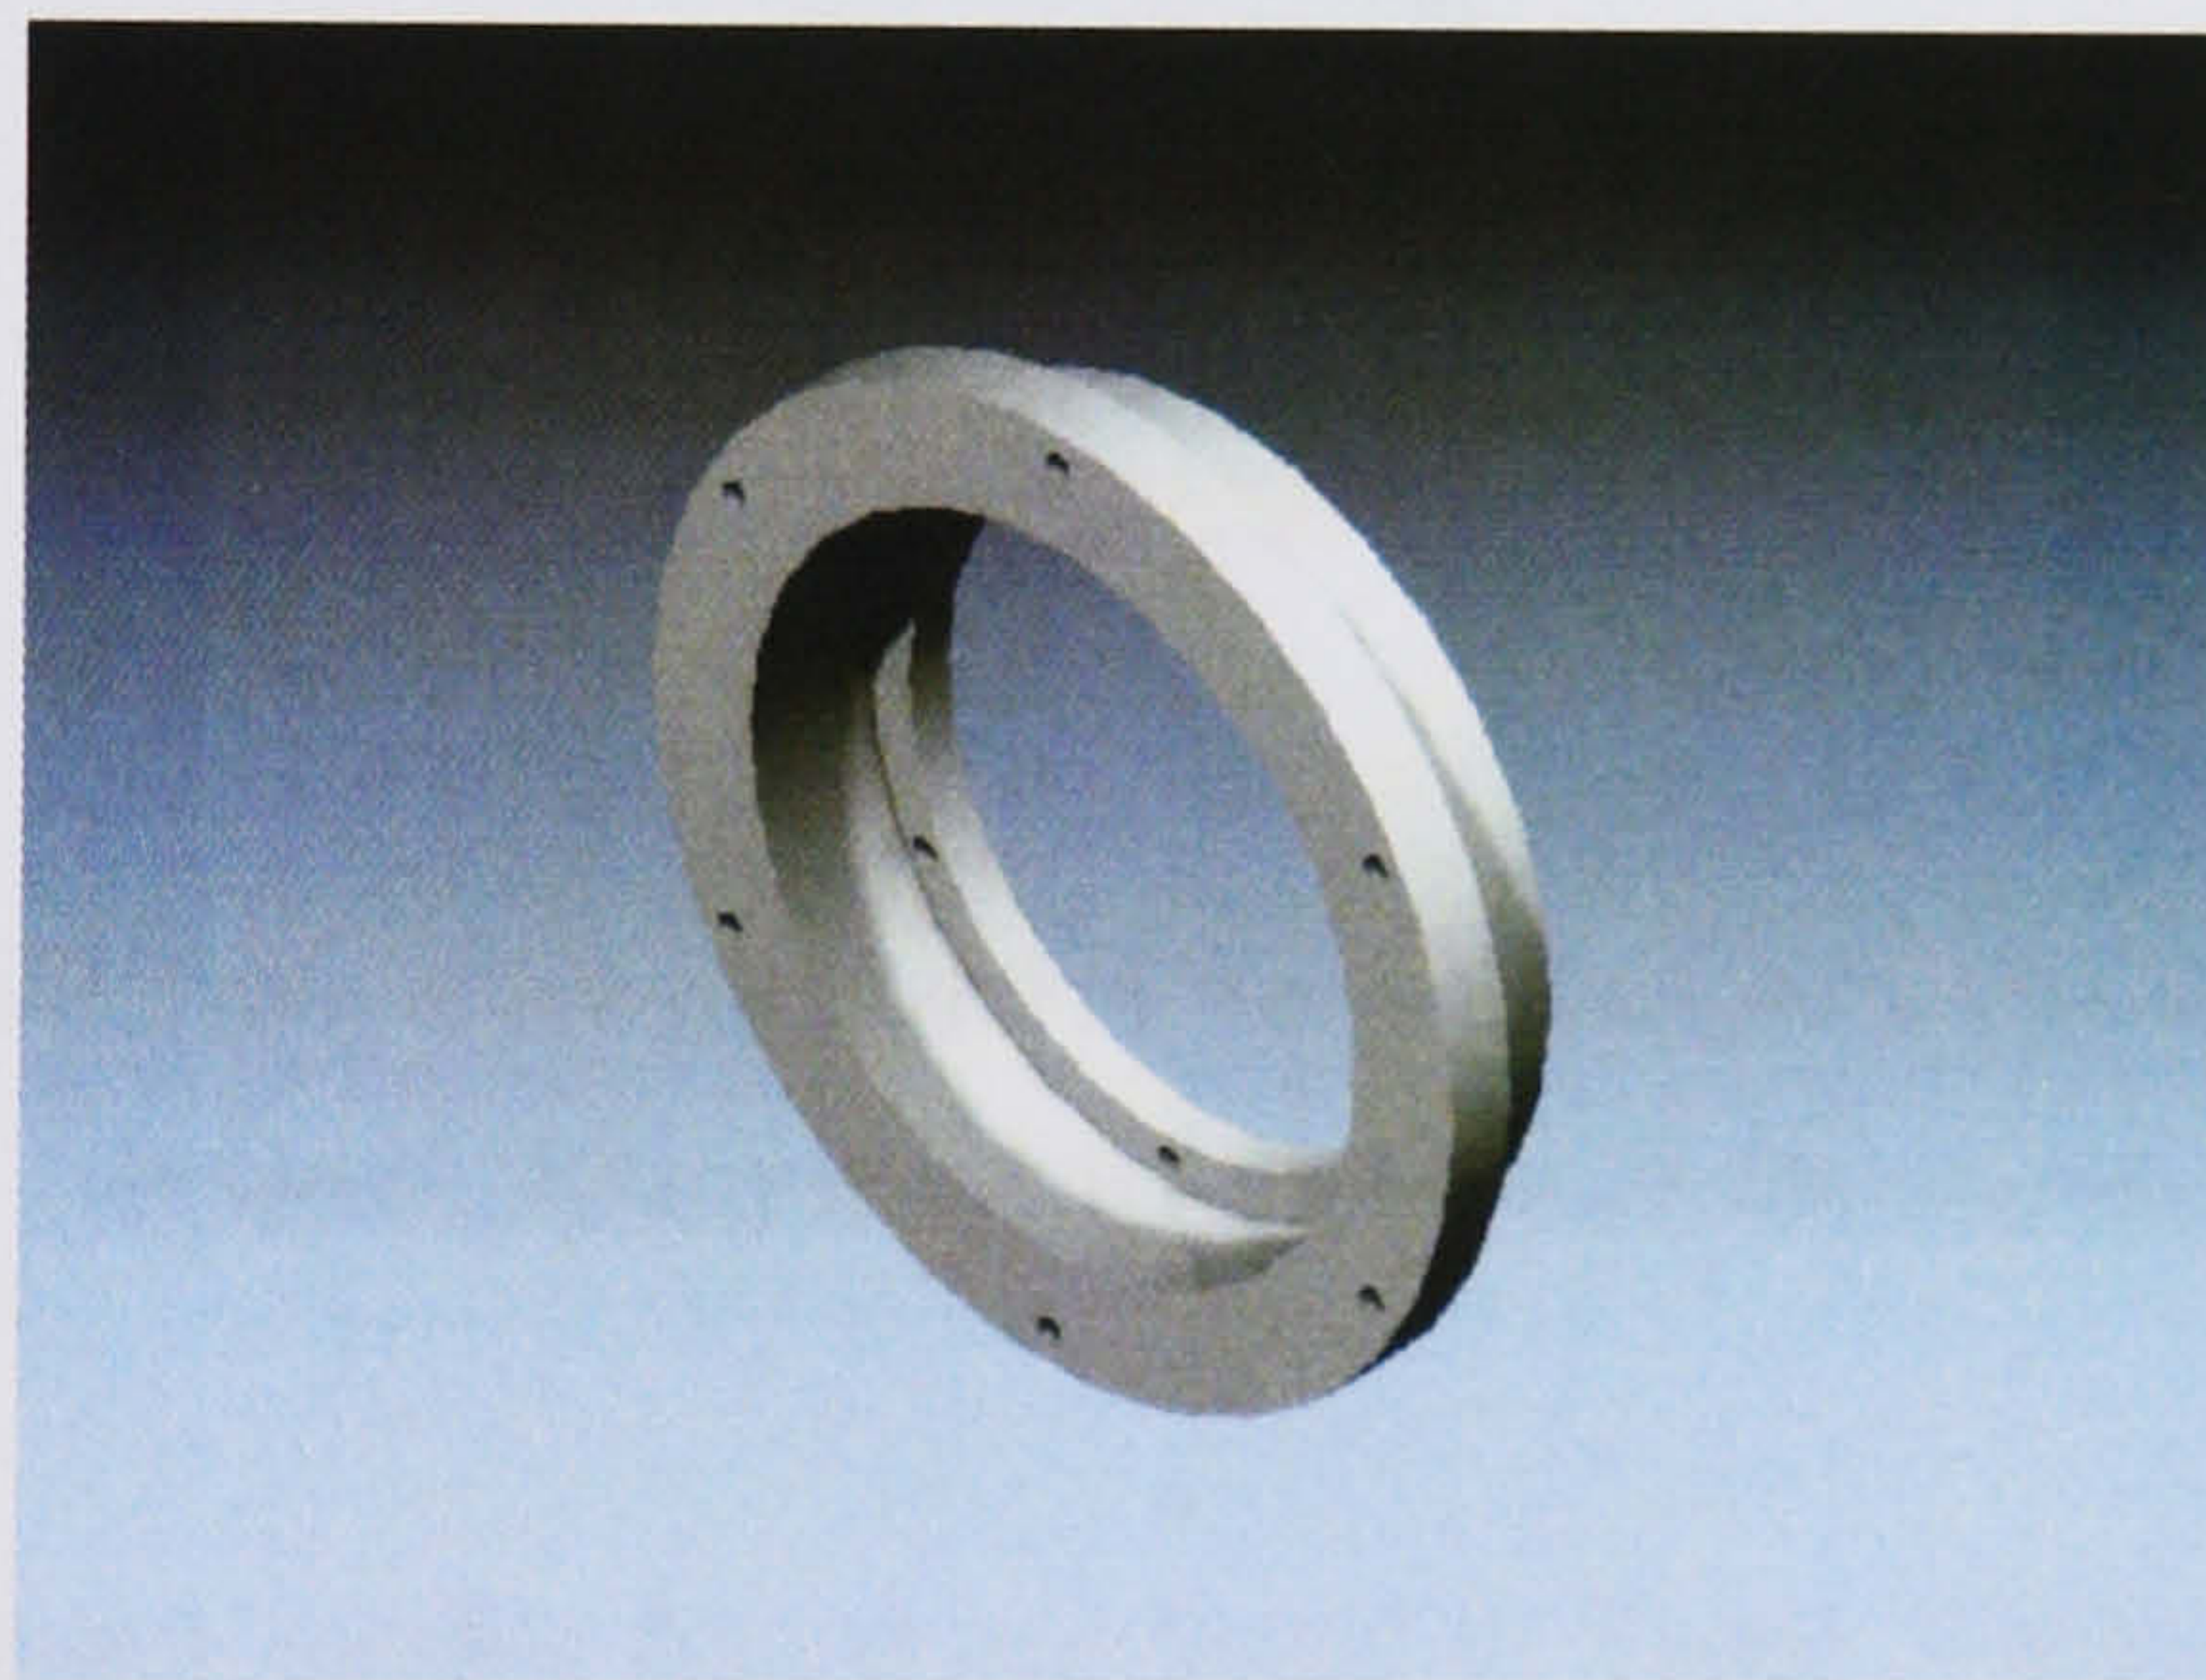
Solidworks rendering of the clamp housing. The outer edge would be bolted against the top plate while the inner rim provides the bolt holes used to force the clamping ring against the glass.
